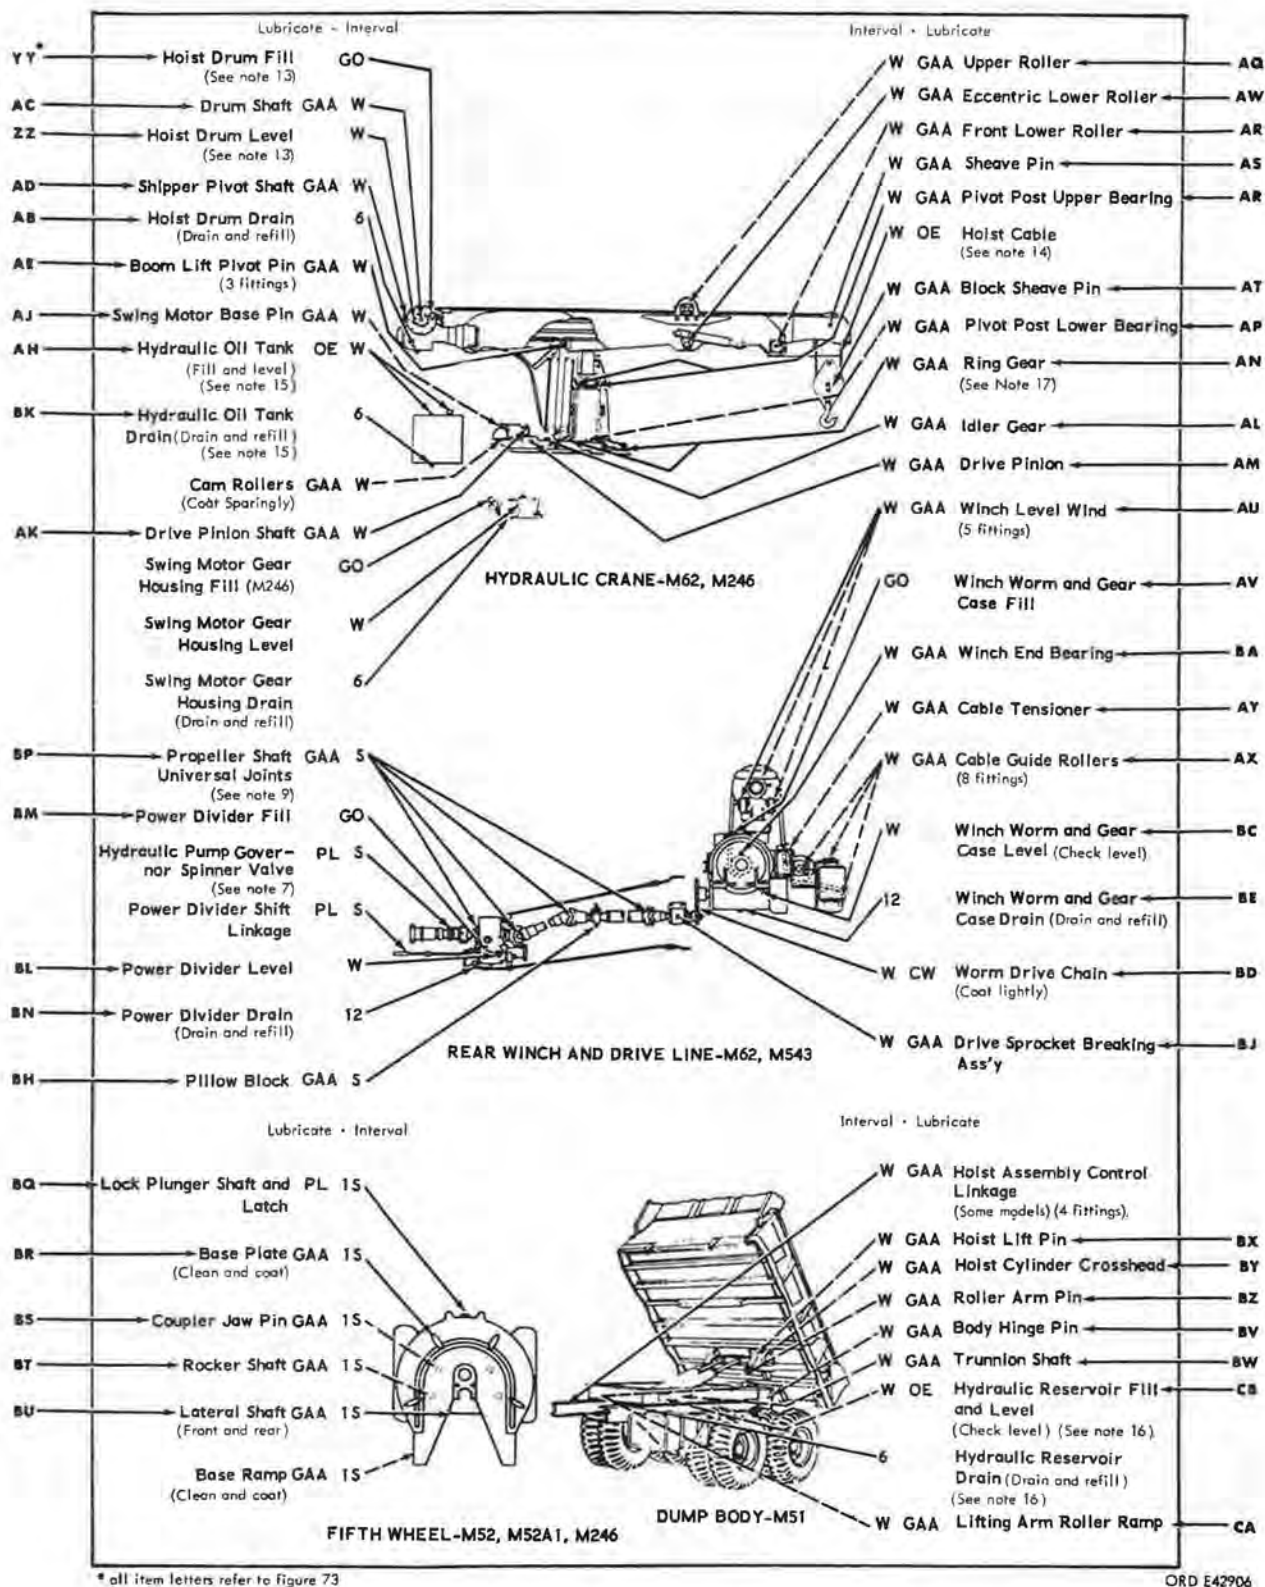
Rear, hydraulic crane, fifth wheel, and dump body lubrication chart.
